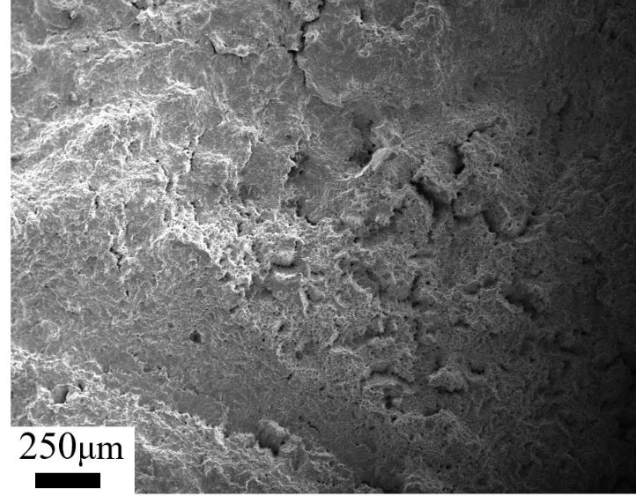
General view of the fatigue fracture surface of condition H 316L sample broken in 898.253 cycles, at 85% of σ_{yield} .
